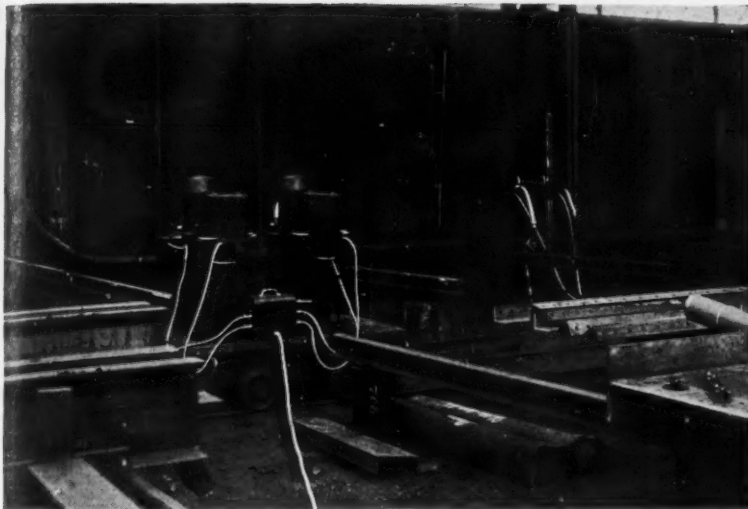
Workshop X-ray inspection of welded plate girder
